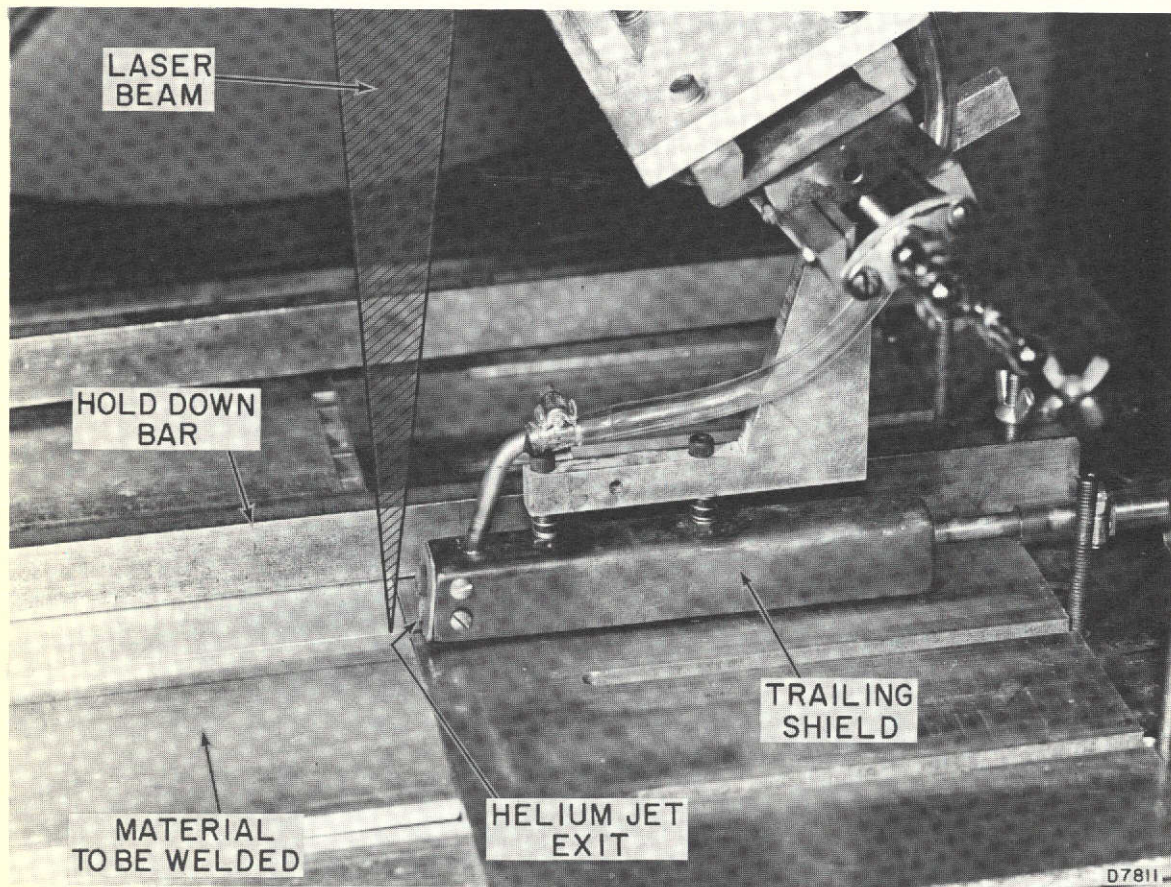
Hood 6-A Used for Welding Both $1/4$ " and $1/2$ " D6AC
